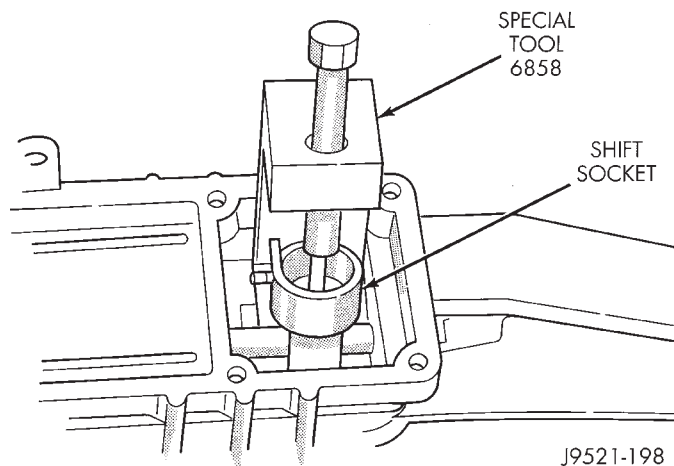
Unseating Shift Socket Roll Pin With Tool 6858
